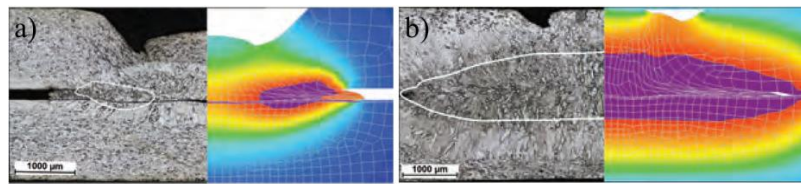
a) Initial steps of projection welding under high welding forces; b) Last steps of projection welding under high welding forces (Mikno 2016).
